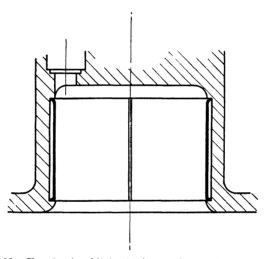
Heat-insulated lining in sleeve-valve combustion chamber
